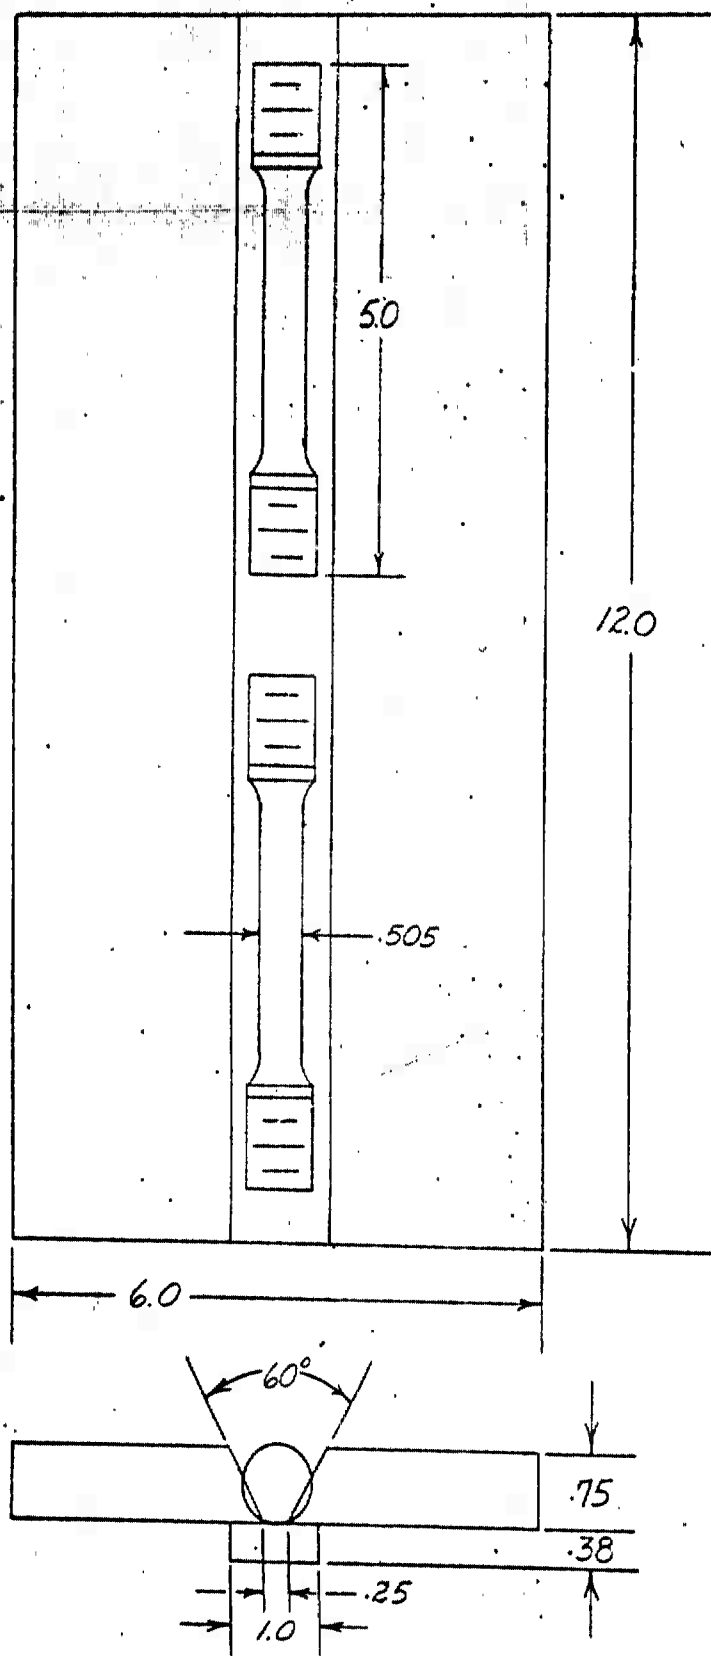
ALL-WELD-METAL SPECIMEN LOCATION.
